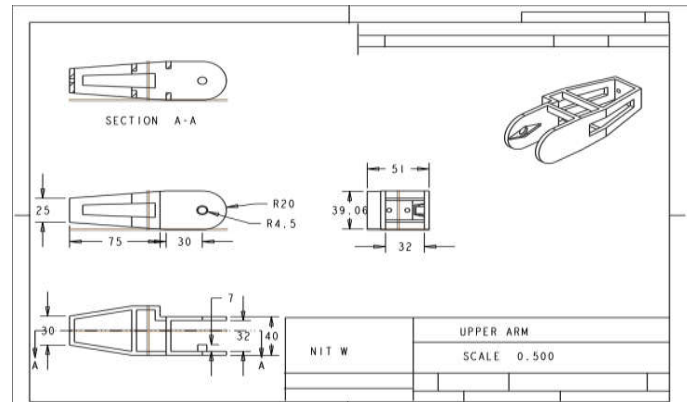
(a) Plane of view, isometric view and dimension of elbow arm
